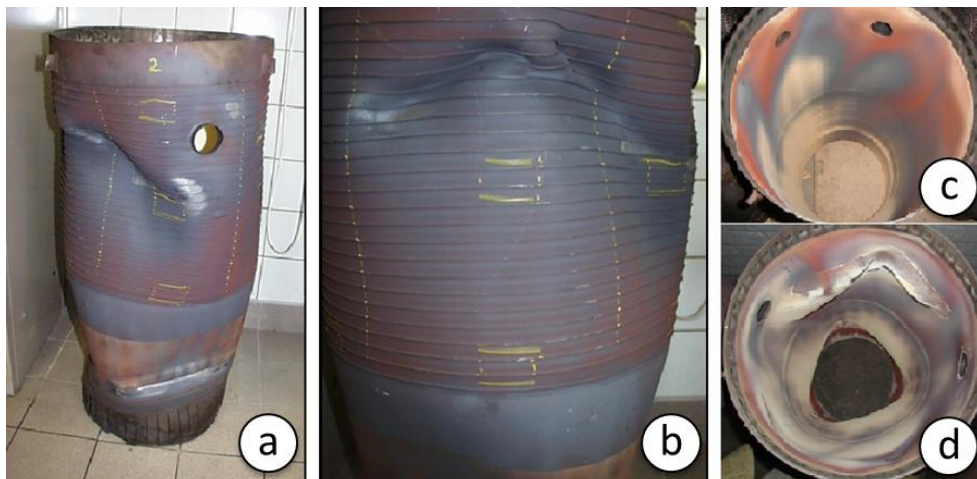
Failure pattern of the combustion liner: the deformation (a, b) - outer surface, the spiral-shaped wear (c) - inner surface, and the cracked final failure (d)
